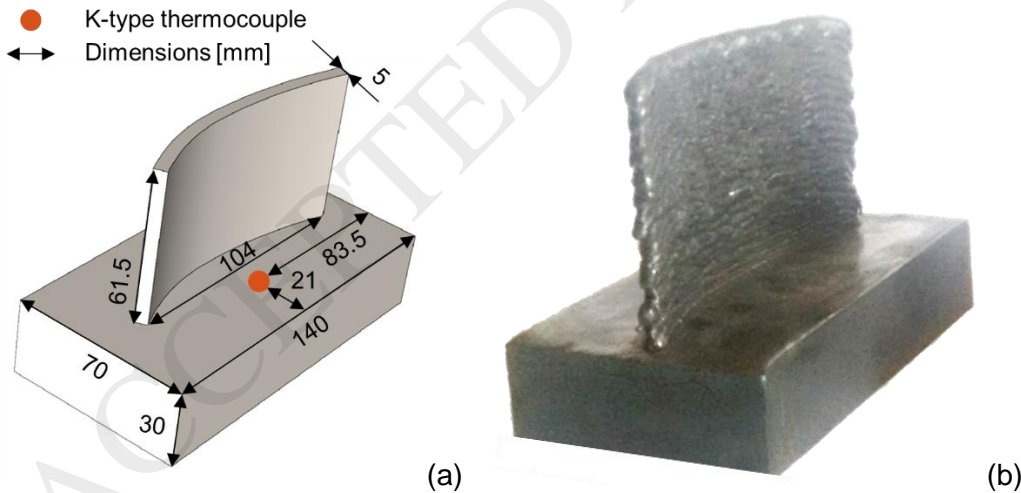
The airfoil used as test case: dimensions and thermocouple arrangement (a); actual manufactured part (b)
